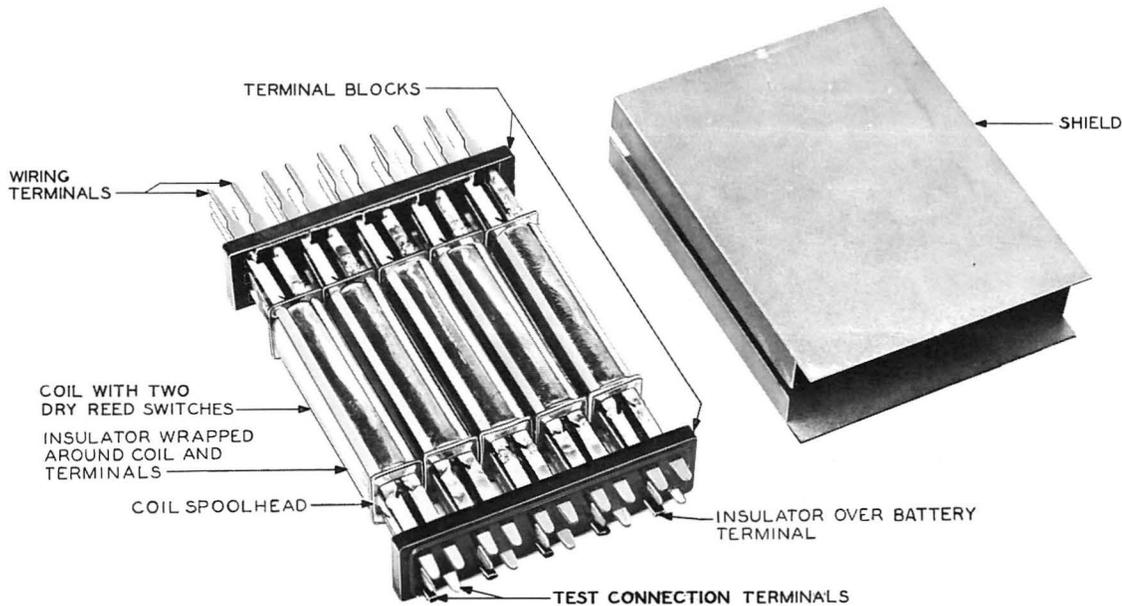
293-Type Relay With Cover and Shield Removed
